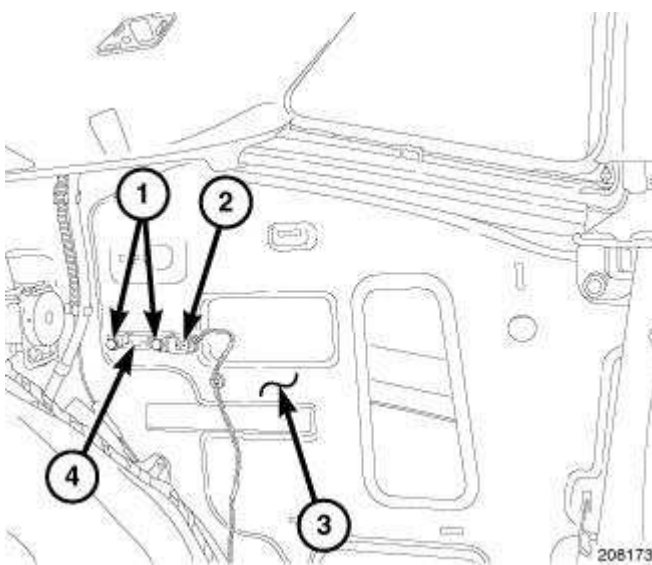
Identifying Retaining Screws, Side Impact Sensorelectrical Connector & Side Impact Sensor
